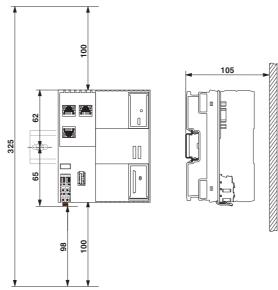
Mounting distances: AXC 305x, AXC F 2152 controller (dimensions rounded)
